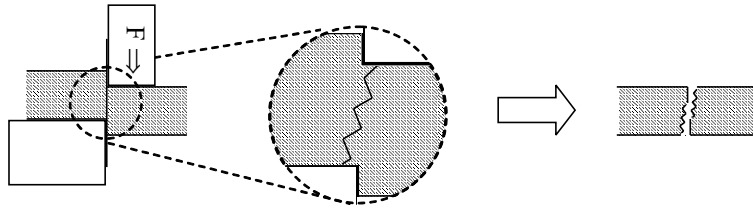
side-view of the cut-to-length process of the metal sheets.
